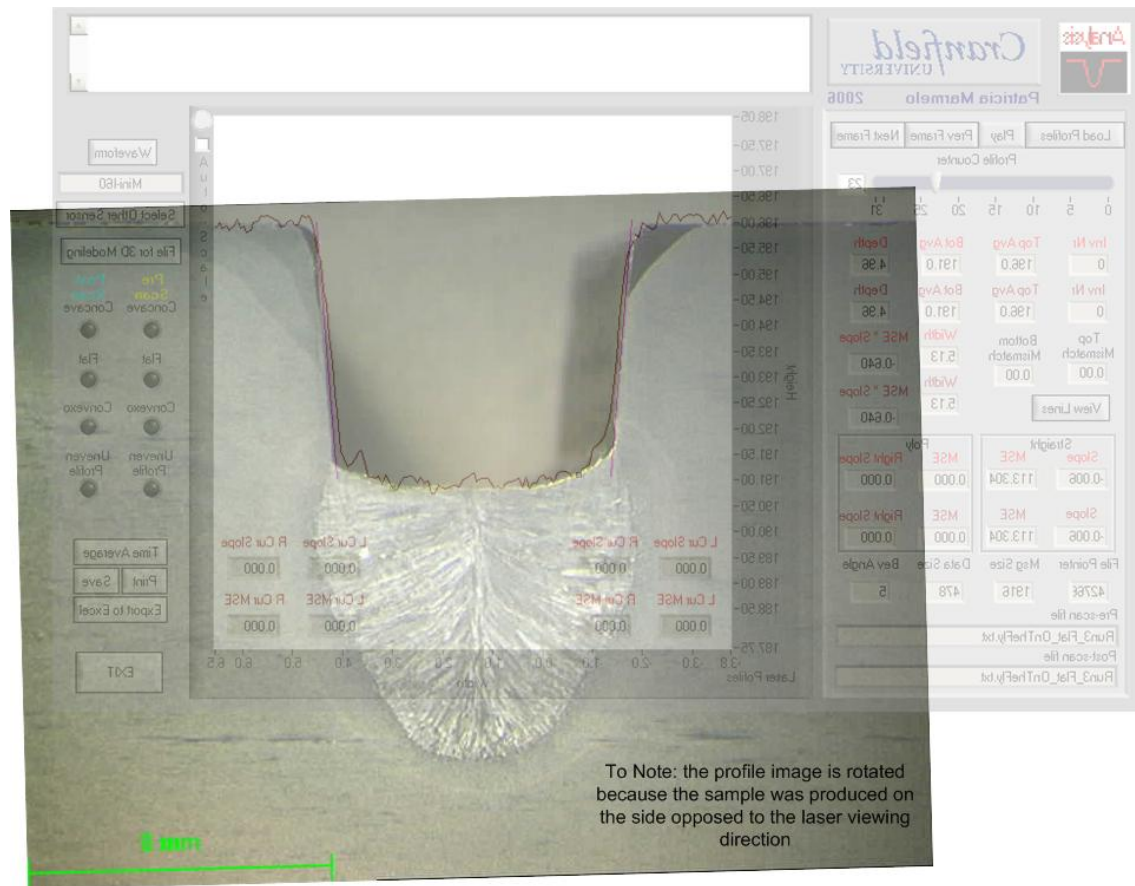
Weld scan superimposed on the macro image of Run 3 in the Flat position.
